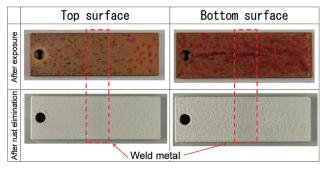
Appearances of weld joints of 3% Nickel-added high-performance weathering steel after exposure test (15 years)
